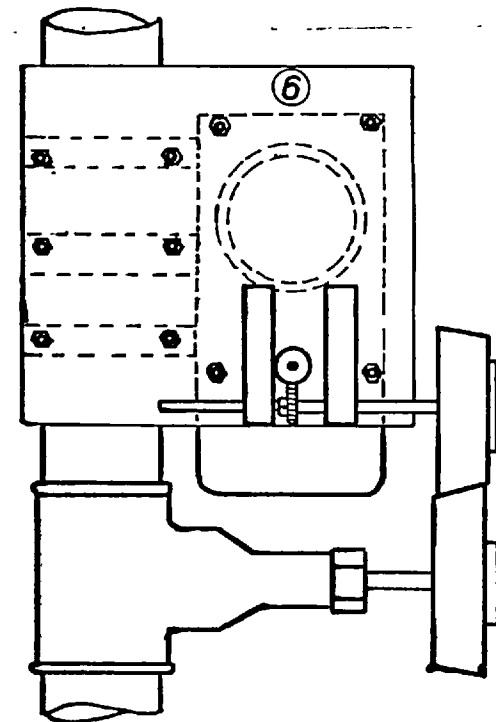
2 -750W IMMERSED HEATERS ARRANGEMENT
